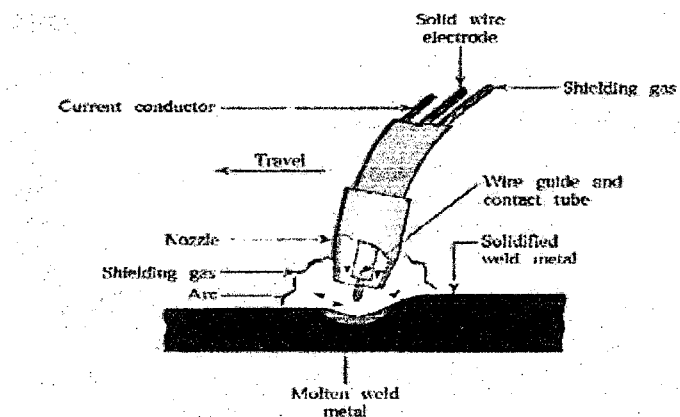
Basic structure of metal inert gas (MIG) welding.
